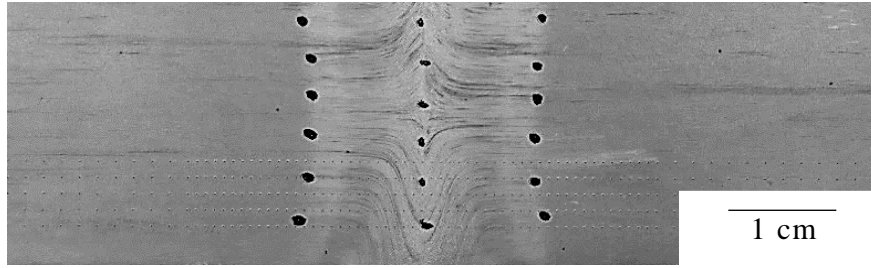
Macrograph of the longitudinal-axial section of one weld.
